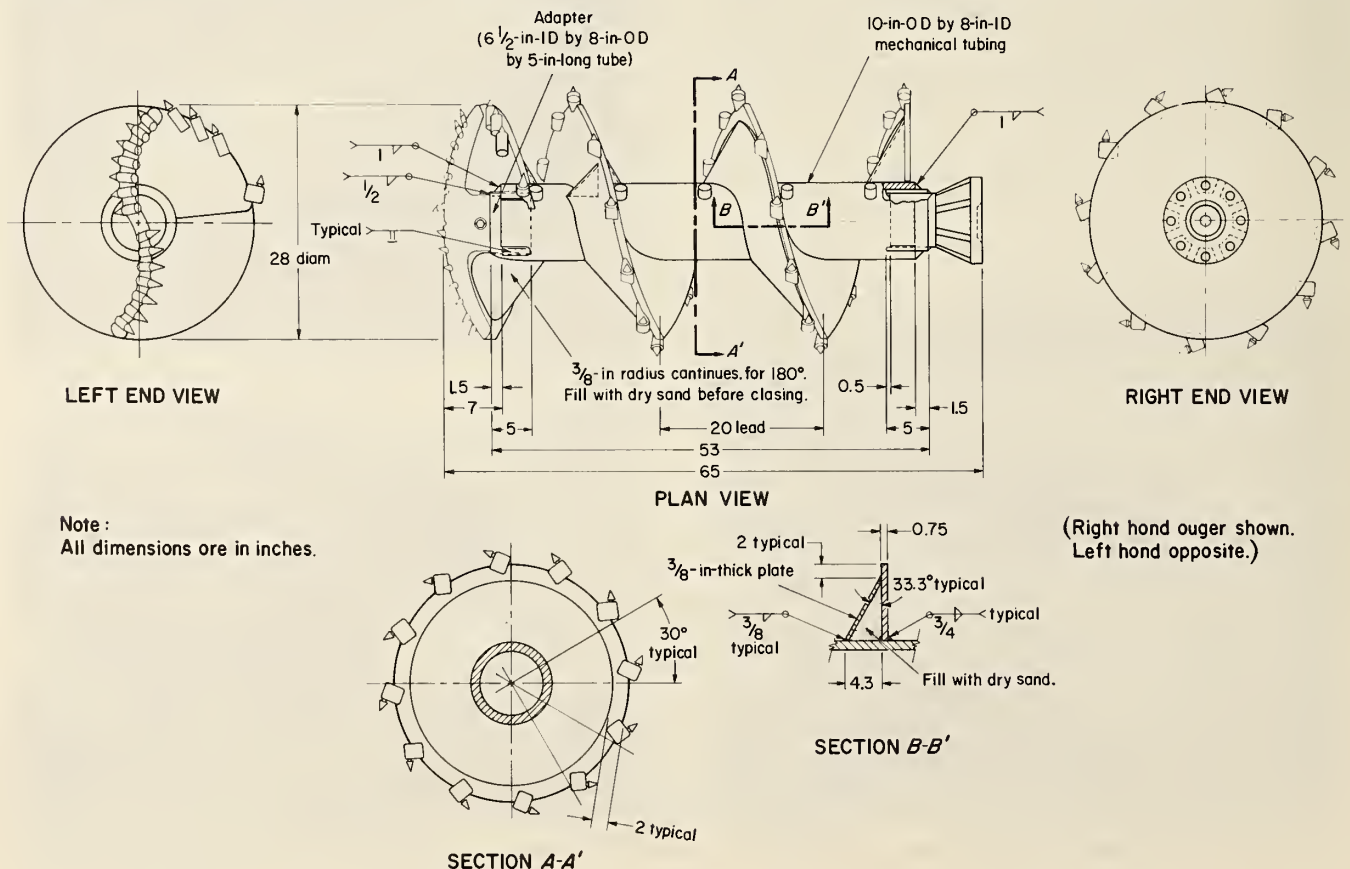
Fabrication drawing of reduced-noise auger.
